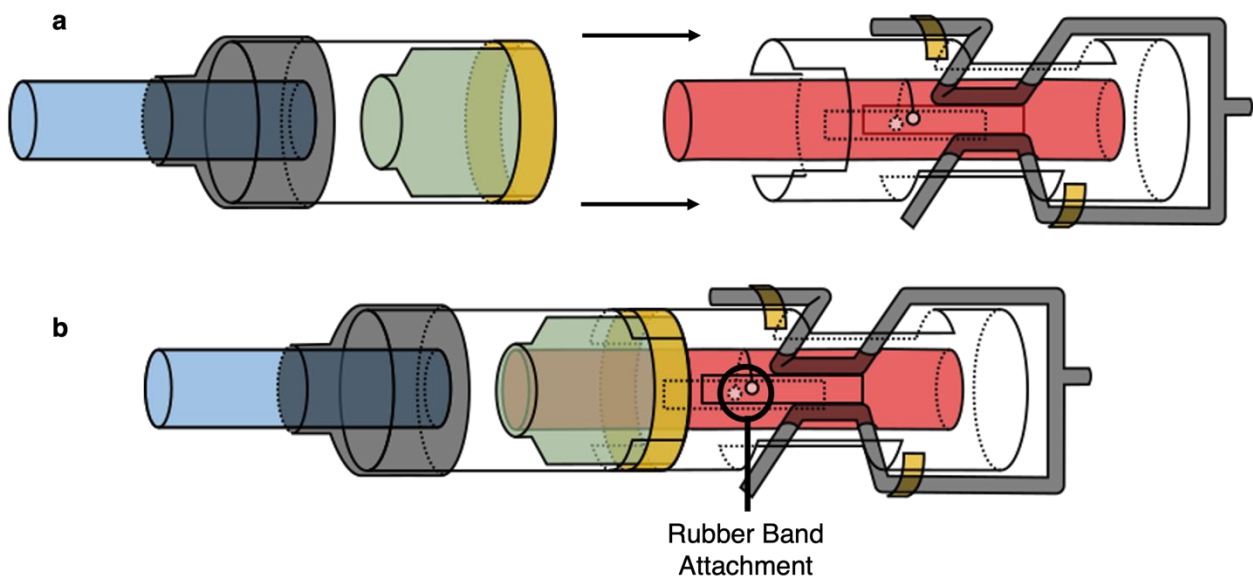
Valve fabrication. (a) Schematic of piston and switch before attachment. (b) Schematic of the completed valve. Materials are labeled in Figures S1-2.
